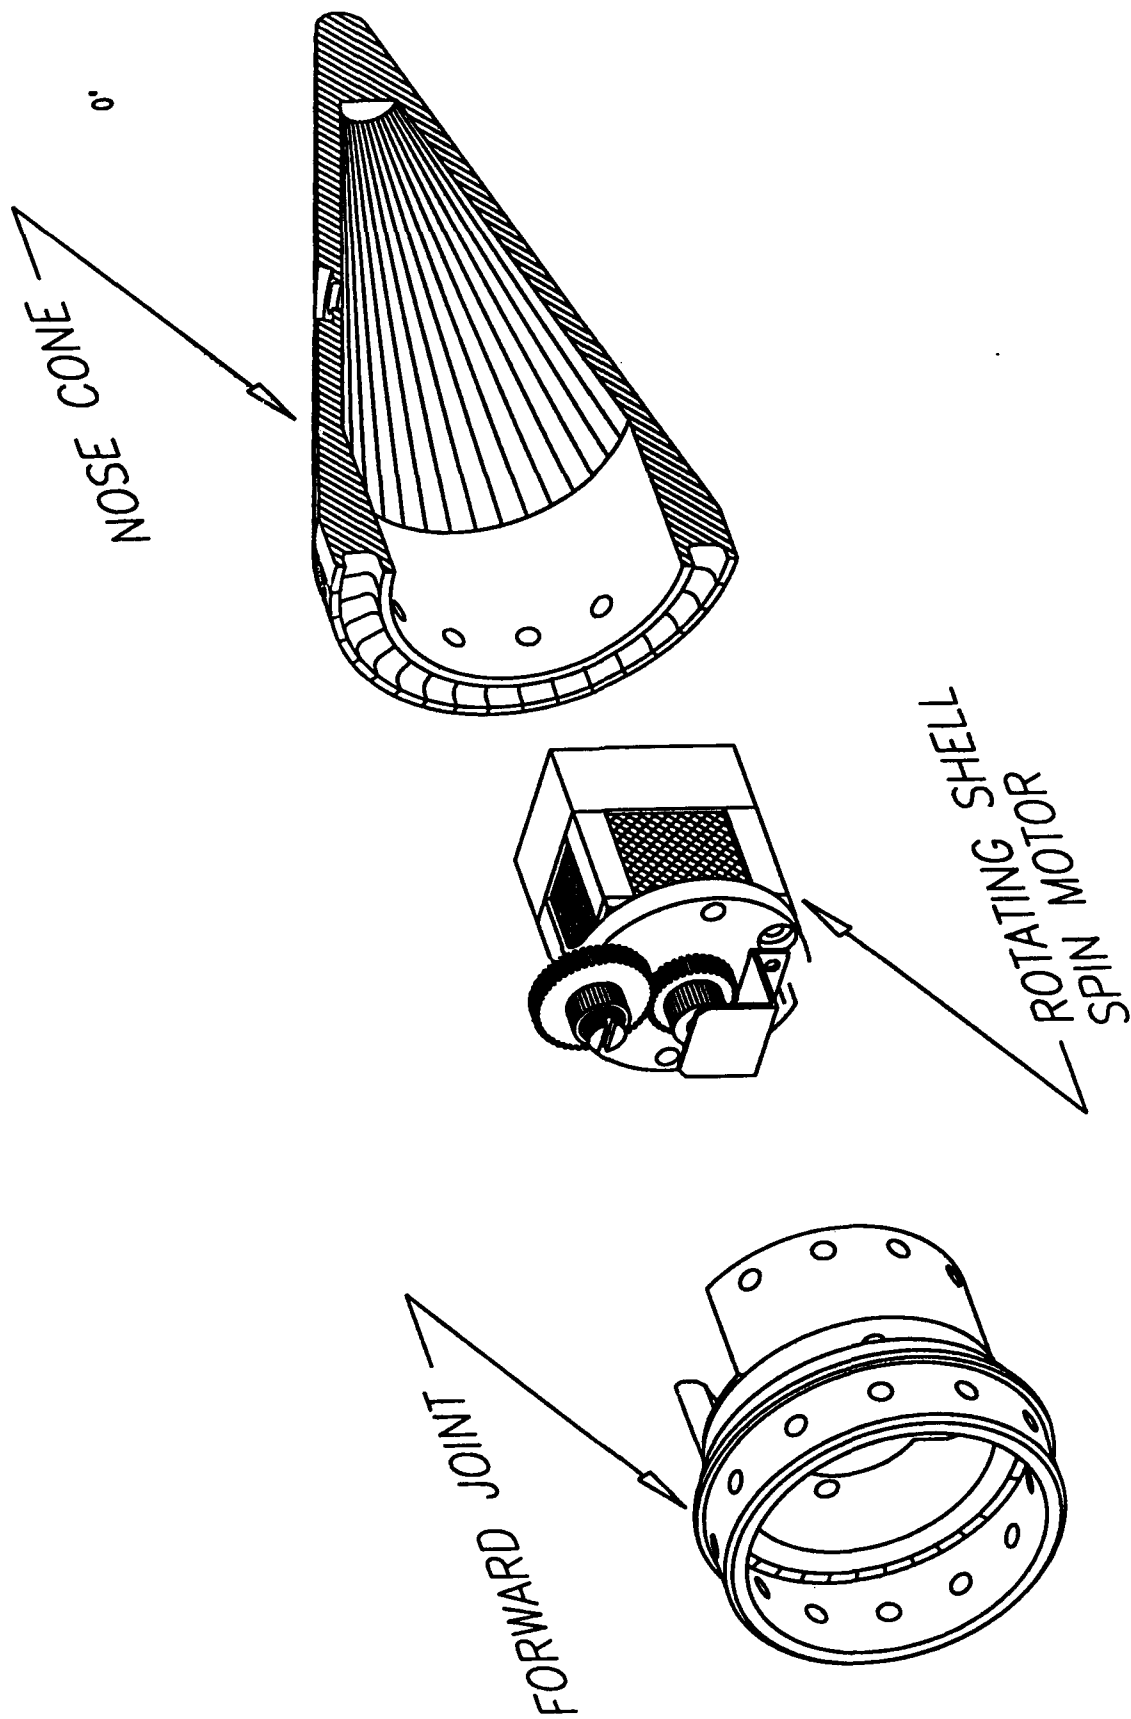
Detail of the Nose Cone, Forward Joint, and Spin Motor
